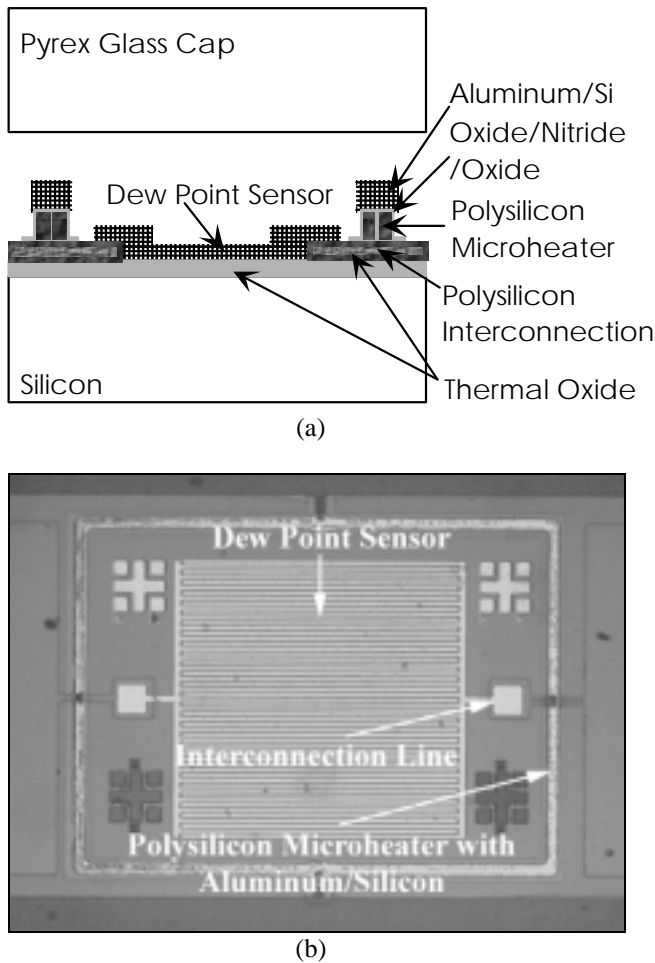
Schematic diagram of the hermetic package fabricated by localized aluminum/Si-to-glass bonding: (a) cross section of the package; (b) optical photograph of the hermetic package seen through the glass capsule.
